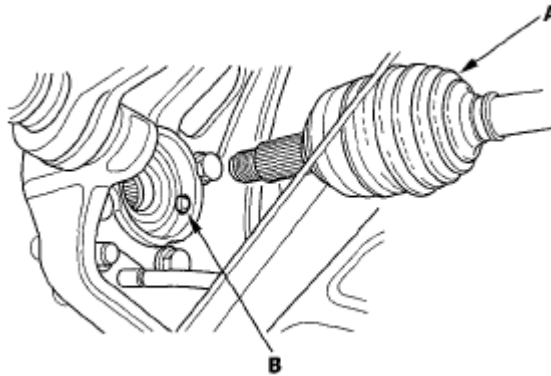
Identifying Rear Driveshaft And Wheel Sensor
